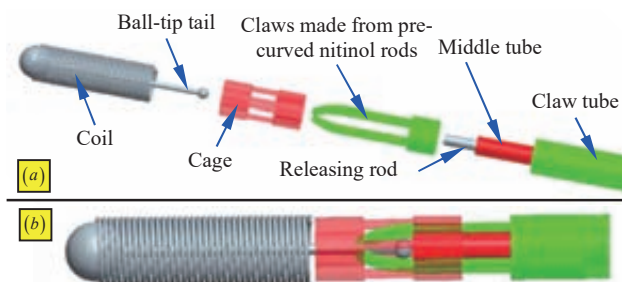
The grasping module: (a) the exploded view, and (b) the fully-assembled view.
